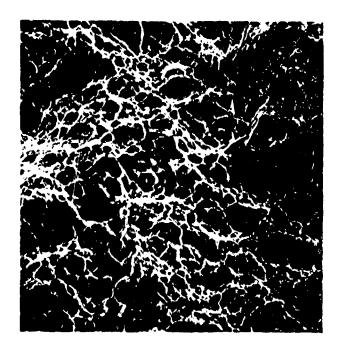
Fracture surface of hydrogen-embrittled  $\Lambda\text{-514}$  weld specimen away from "fisheye," 1500x.
